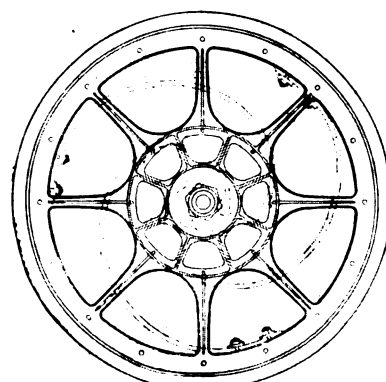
The Halford Spring Wheel.—Elevation of the wheel, showing the latest type of the Guide Plate.
